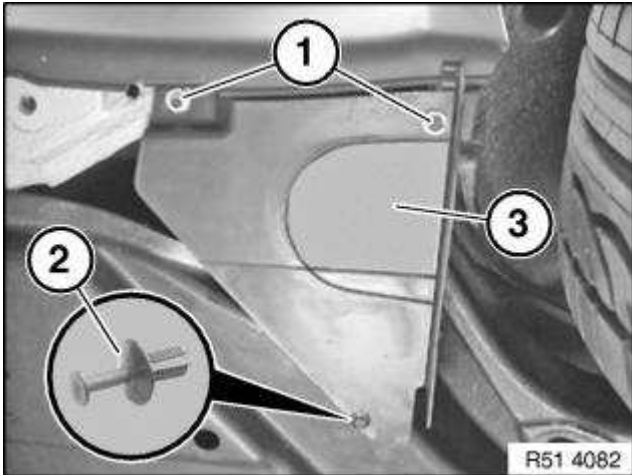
Release Expander Rivet (2) And Remove Cover (3)
